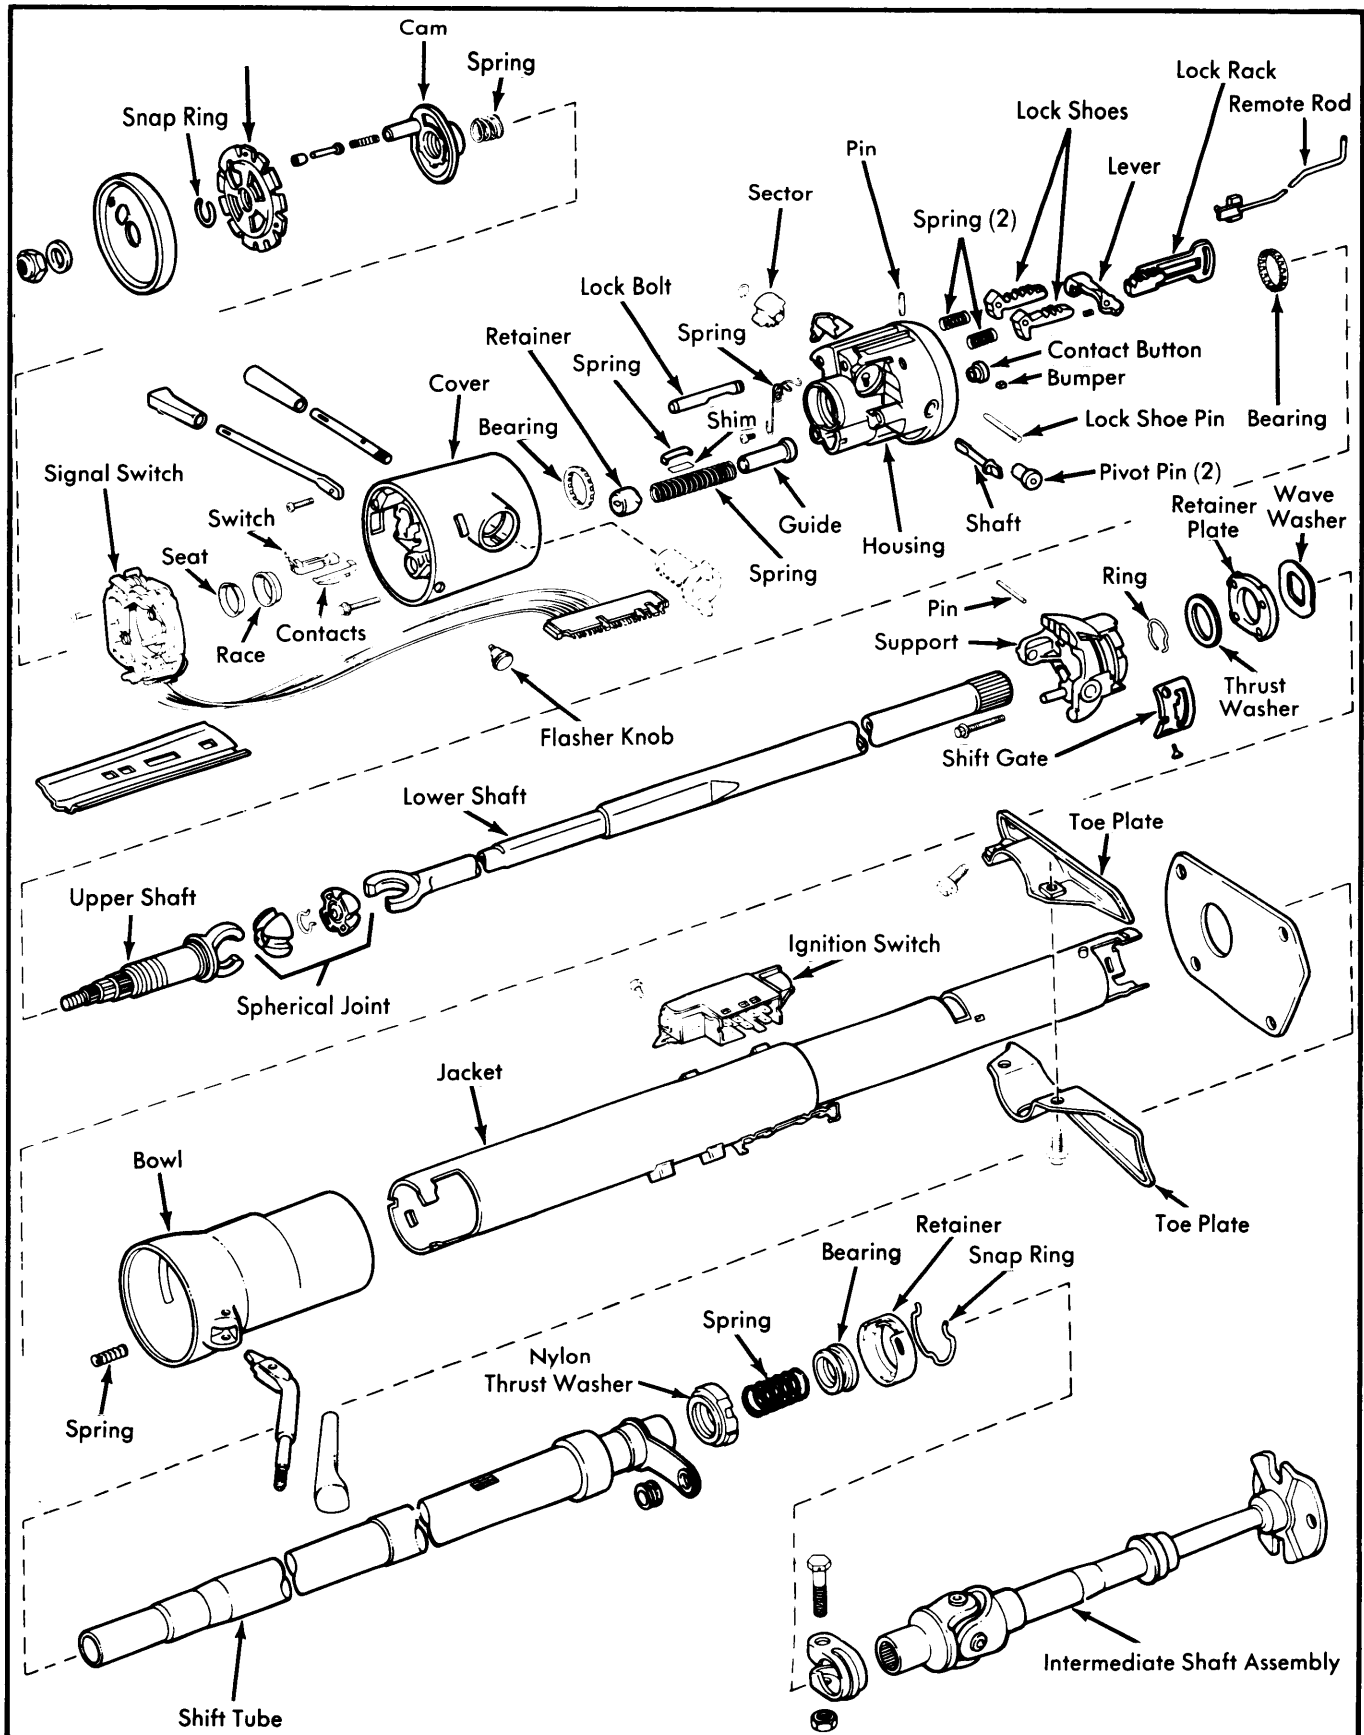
Exploded View of American Motors Adjust-O-Tilt Steering Column Assembly
